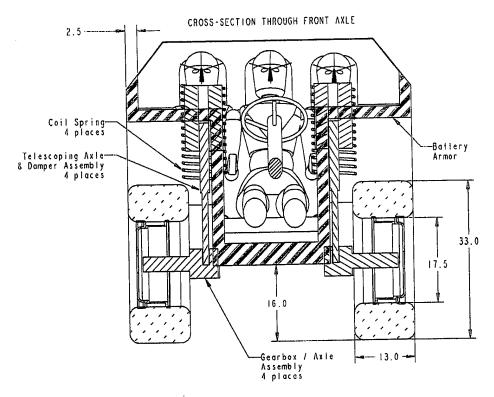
Hybrid Electric Drive System - Perpendicular Cross Section
